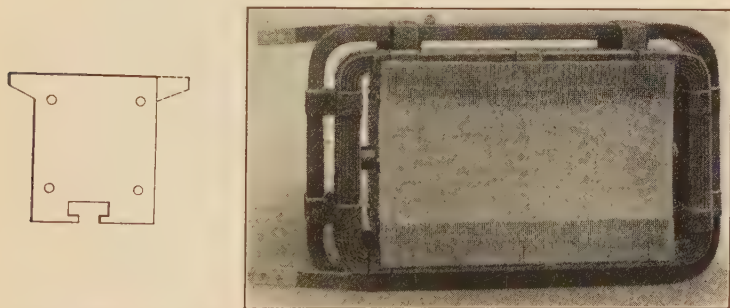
Field core, lamination and pole-piece assembled—Westinghouse d. c. motor.
